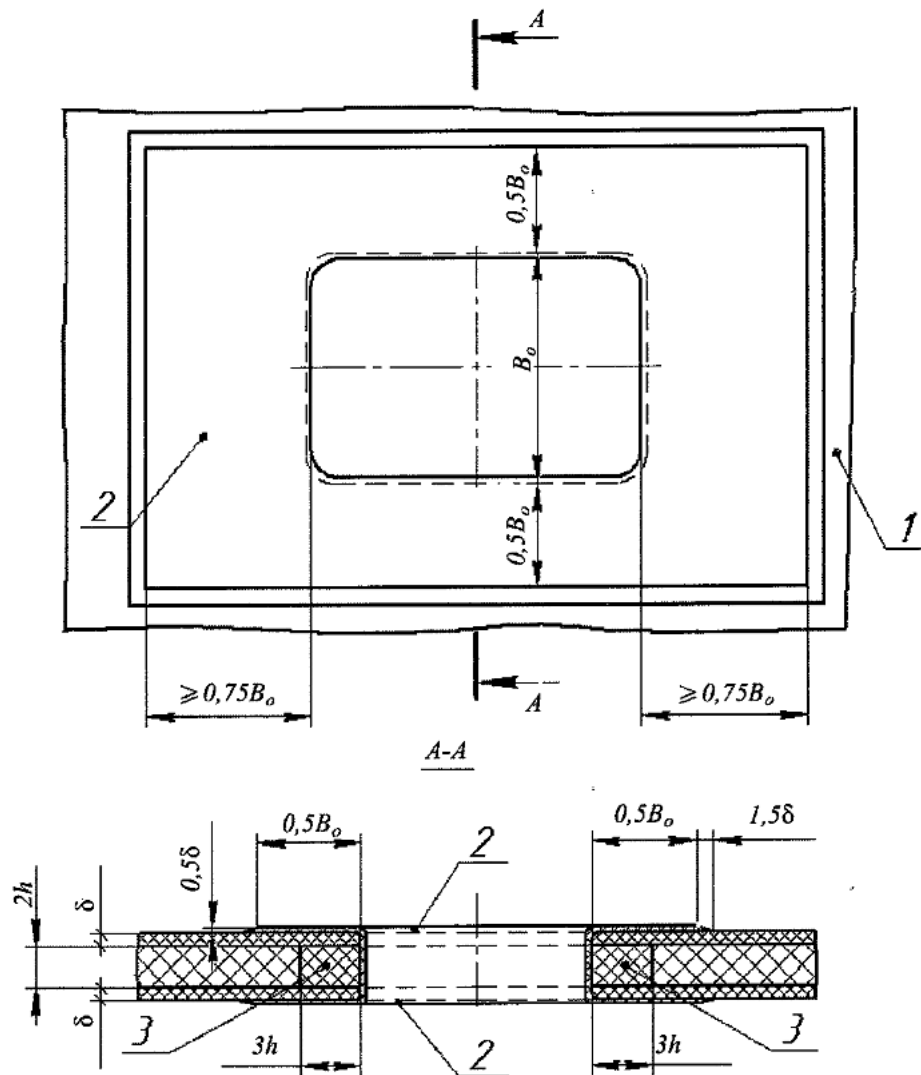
Reinforcement of a rectangular opening in a sandwich structure:
